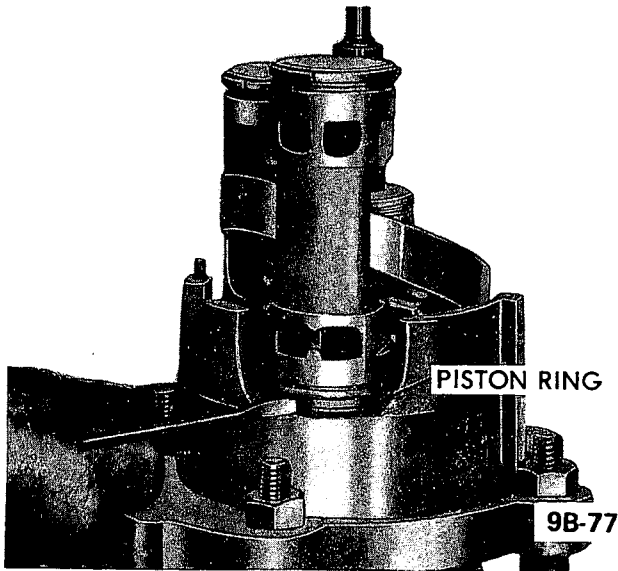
B-104 Compressing Front Piston Rings - 6 Cylinder Compressor
